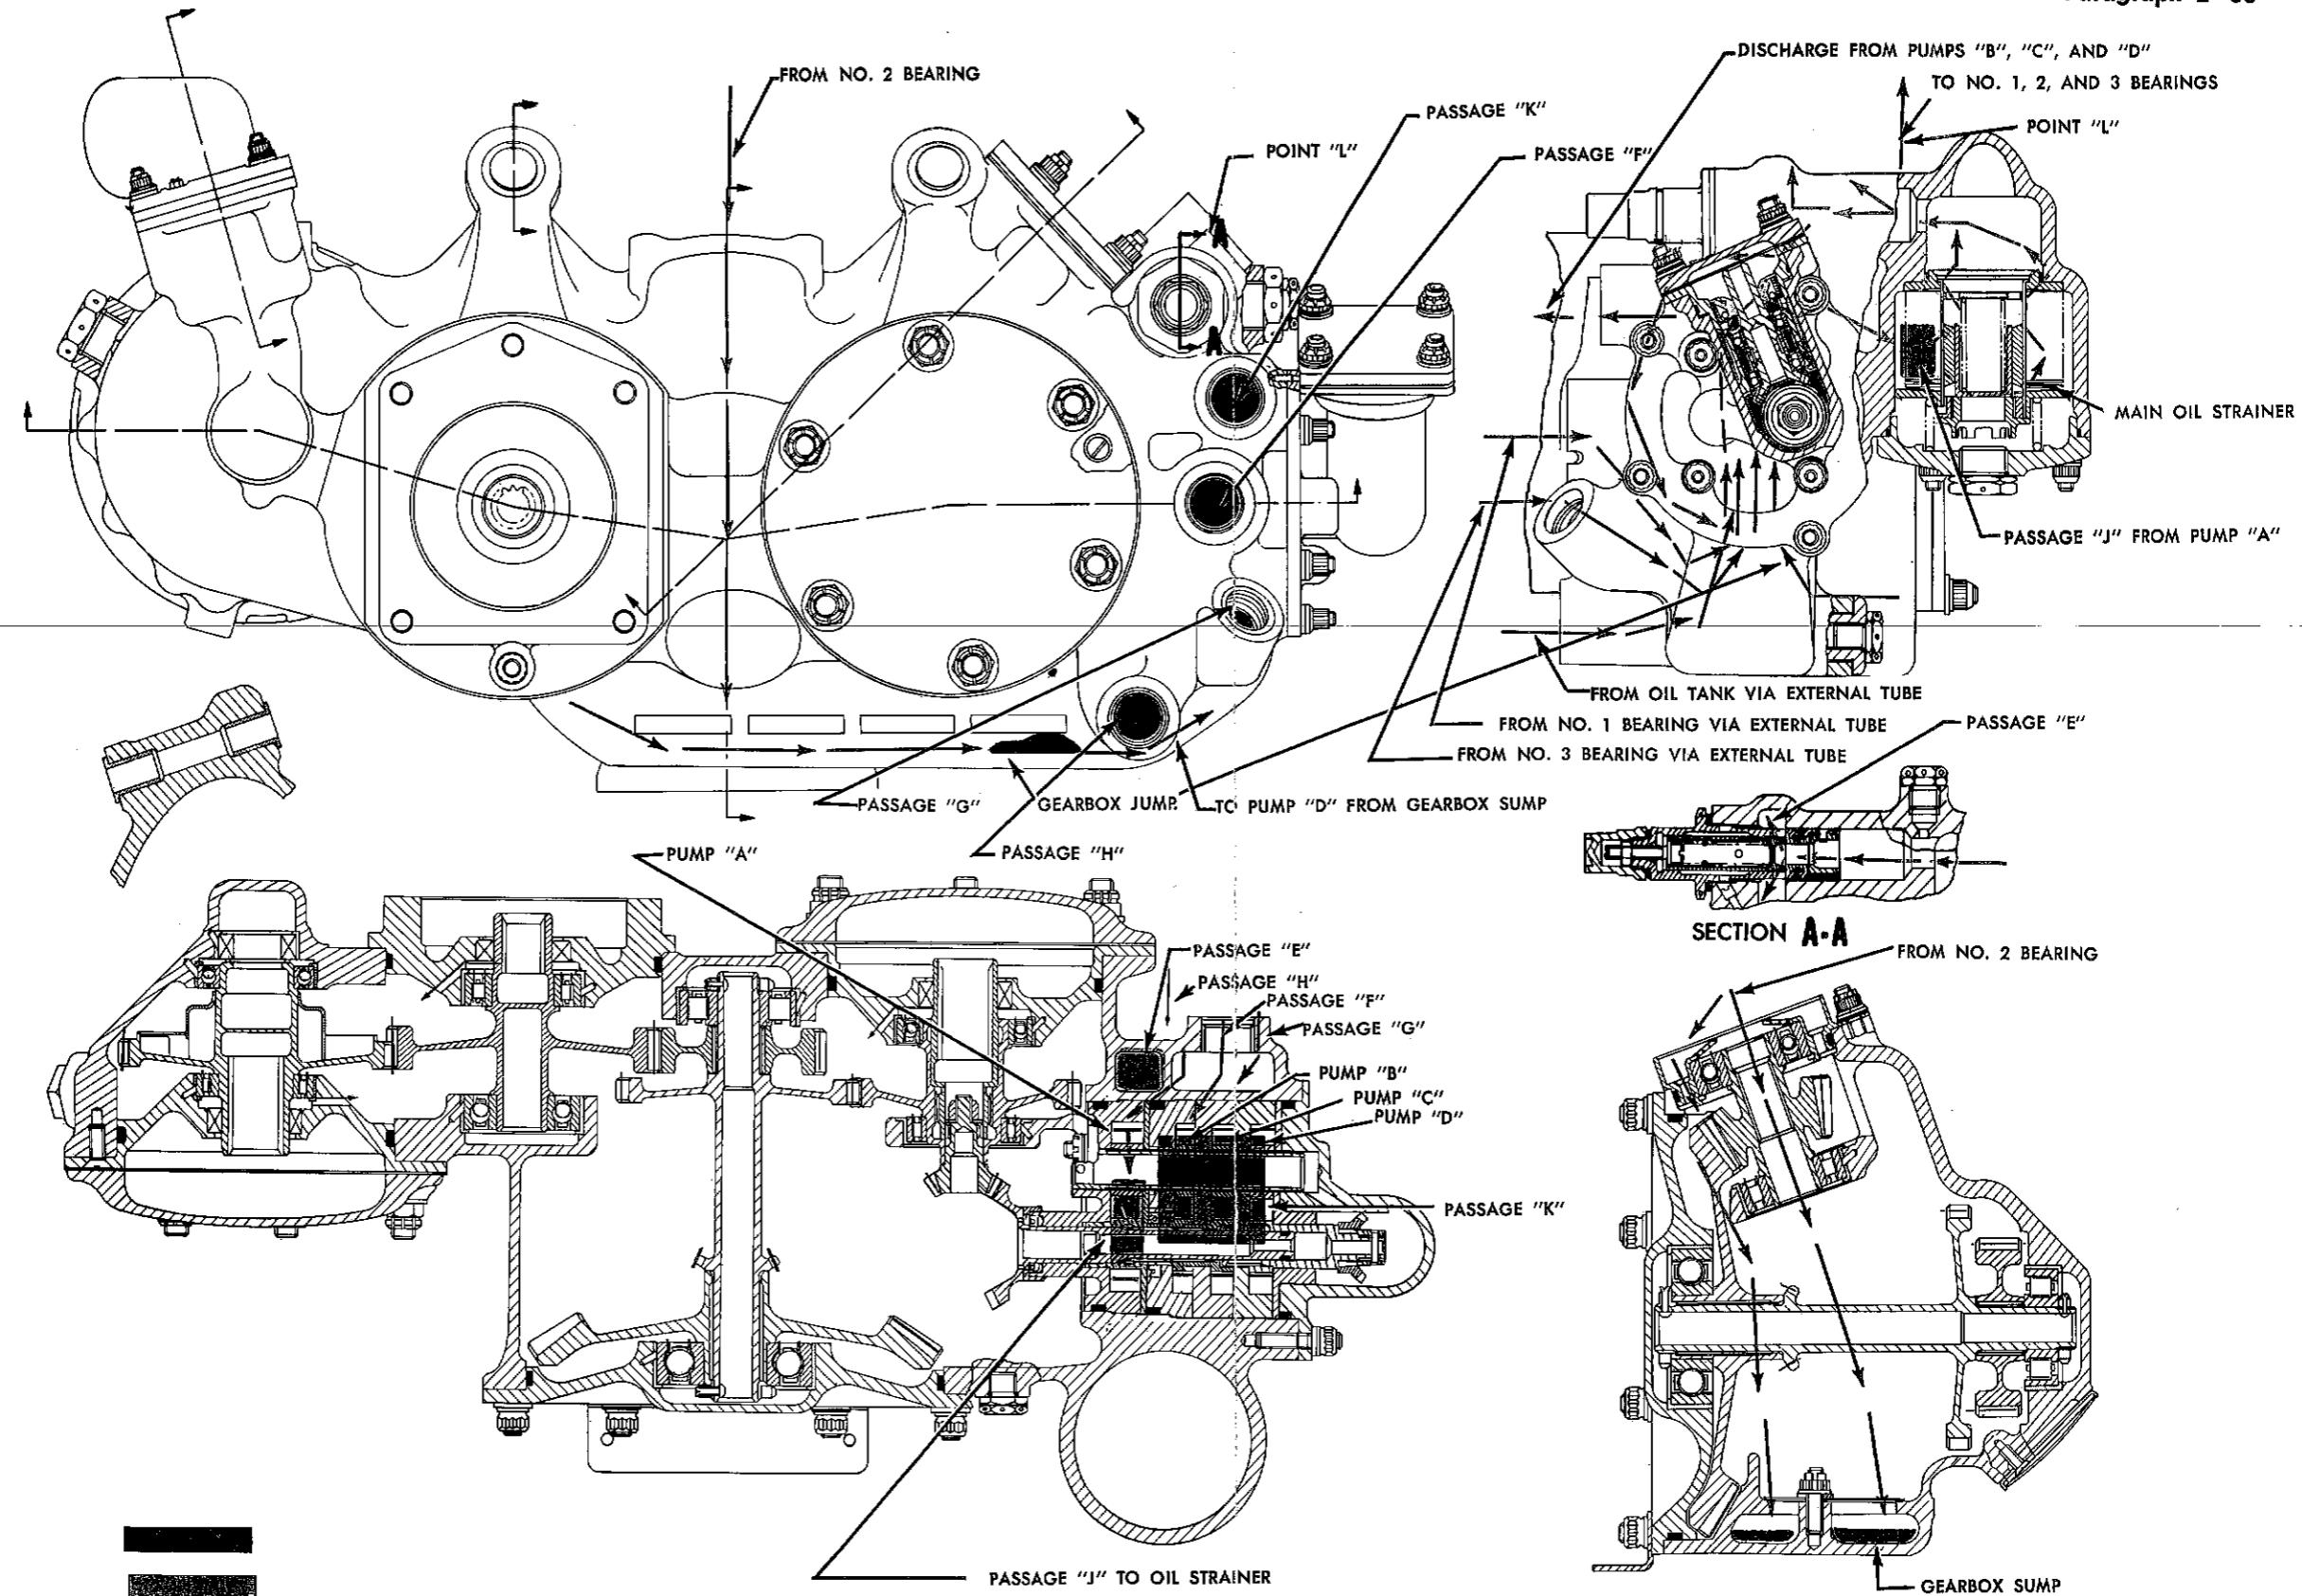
Turbojet Engine Lubrication System (Sheet 3 of 3)
